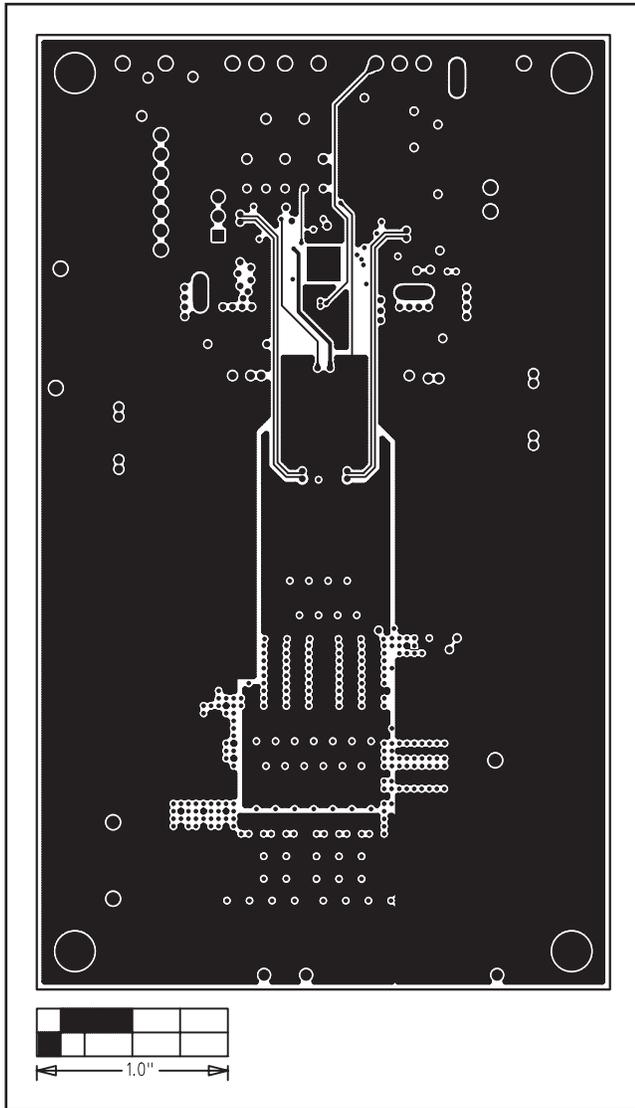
MAX17582 EV Kit PCB Layout—Internal Layer 6 (Signal Layer)
